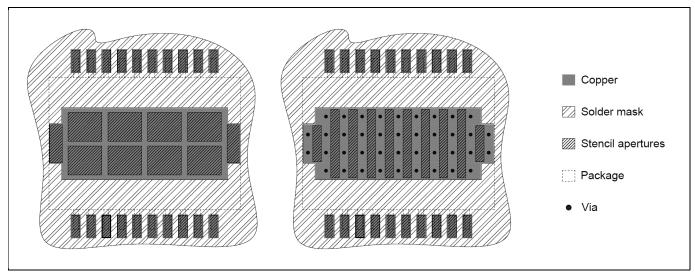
Examples of DSO-20 footprints without (left) and with via-in-pad design (right).
